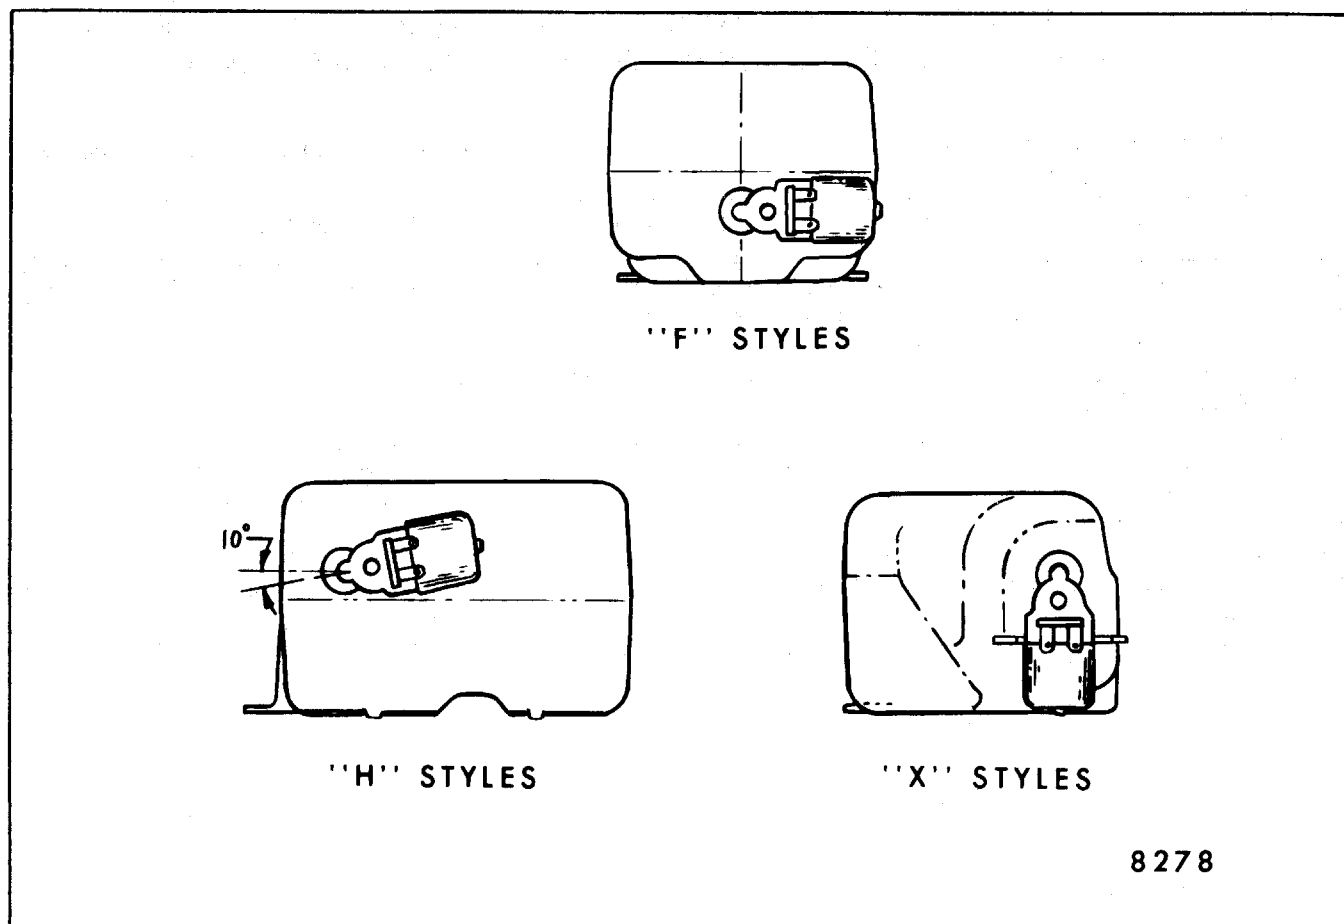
Motor and Pump Assembly Positioning to Jar
